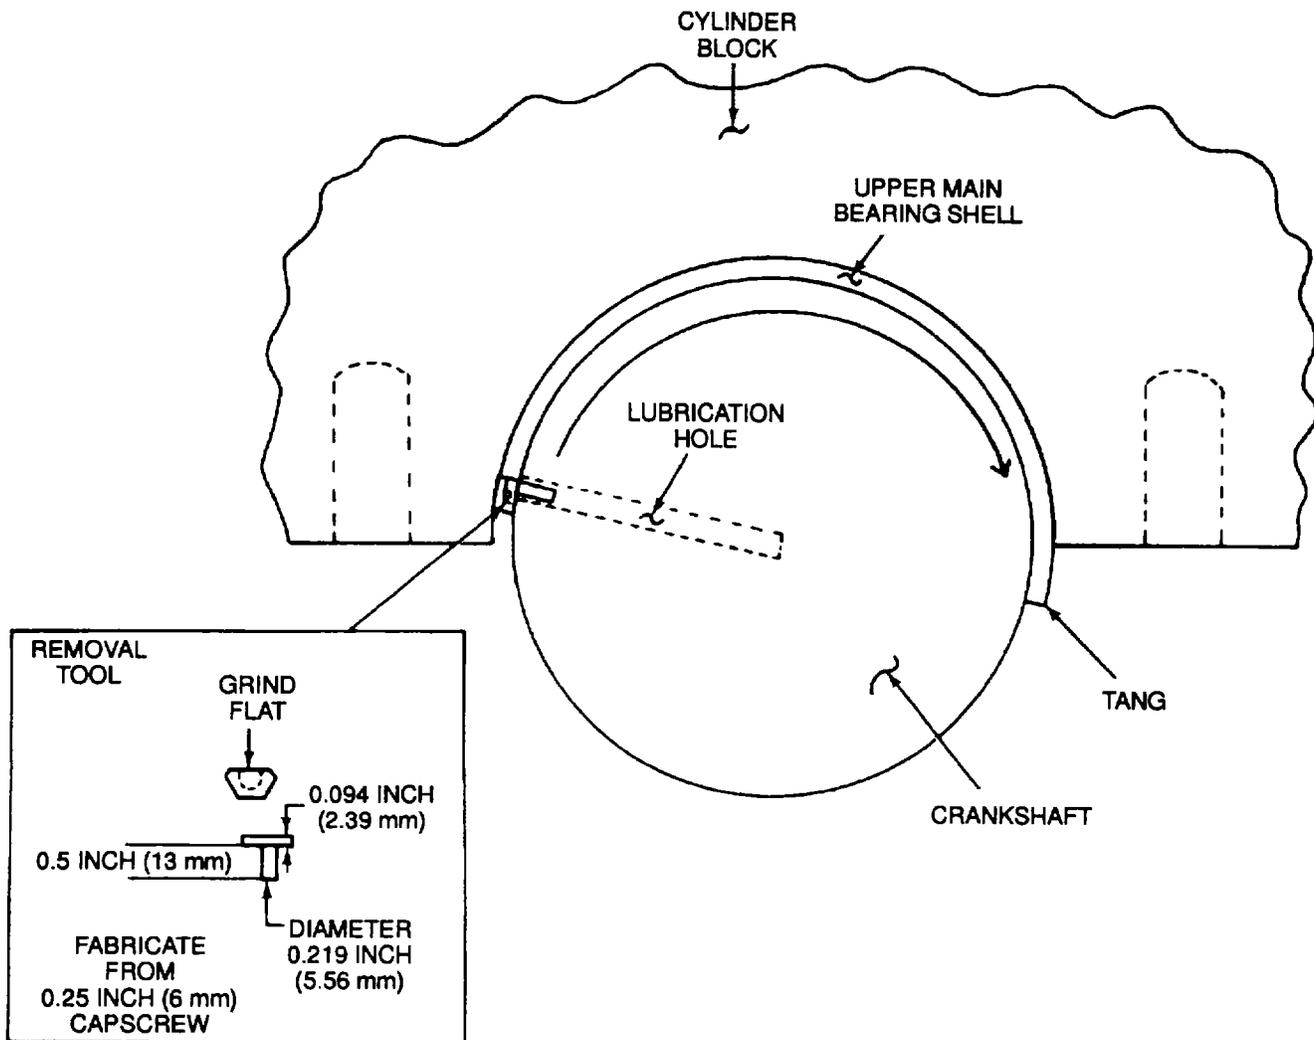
Removing Upper Main Bearing Shell with Fabricated Removal Tool
